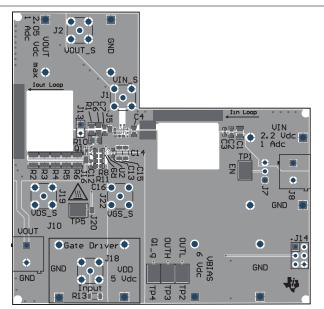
TPS7A14EVM-058 Bottom Assembly Layer and Silk Screen
